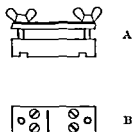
Diagram of cantilever attachment for the bending platform A Front view showing slots for track B Top view of lower half of attachment showing an alignment wire that facilitates seating of the specimen
